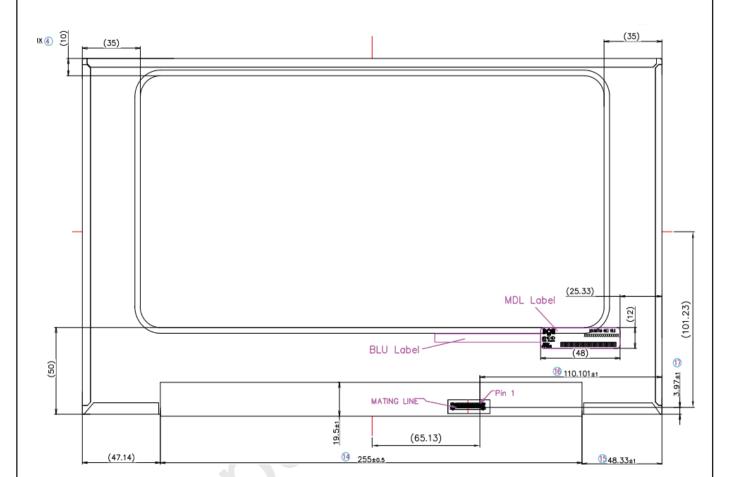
TFT-LCD Module Outline Dimensions (Rear view)
